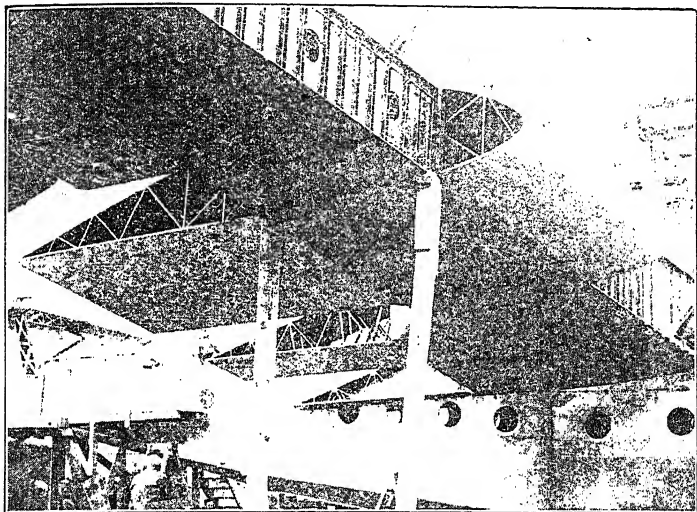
ROHRBACH WING GIRDER, WITH LEADING AND TRAILING EDGES
